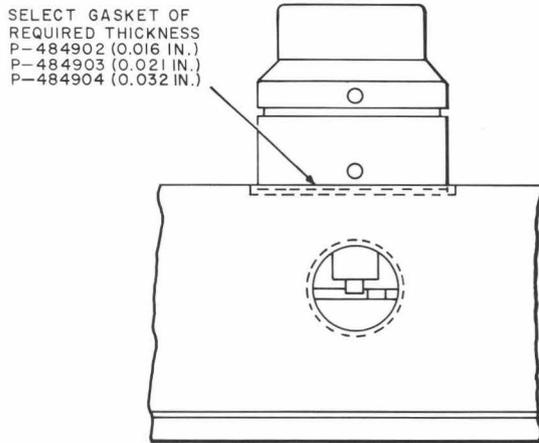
Gaskets Used Under Interposer Magnet Assembly
